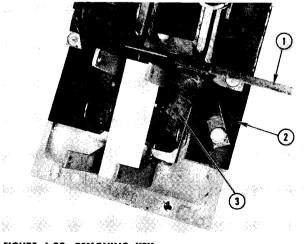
REMOVING KEY 1. Key 3. Arm 2. Base
